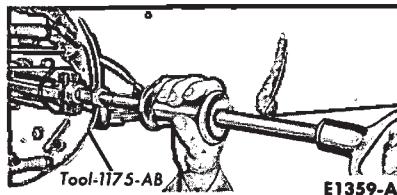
Removing Rear Wheel Bearing Oil Seal
